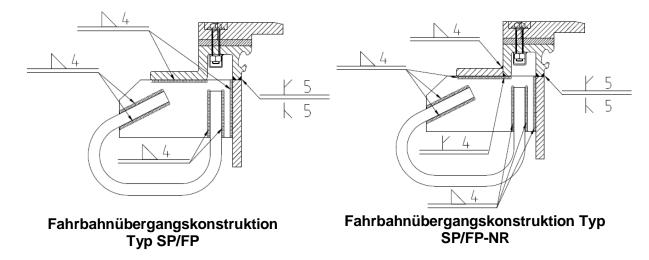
Dimension and type of welds according to EN ISO 2553
